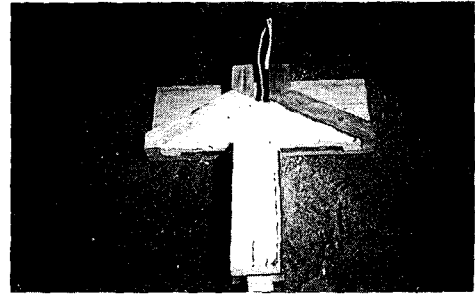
Experimental arrangement of explosive bonding with explosive lens
